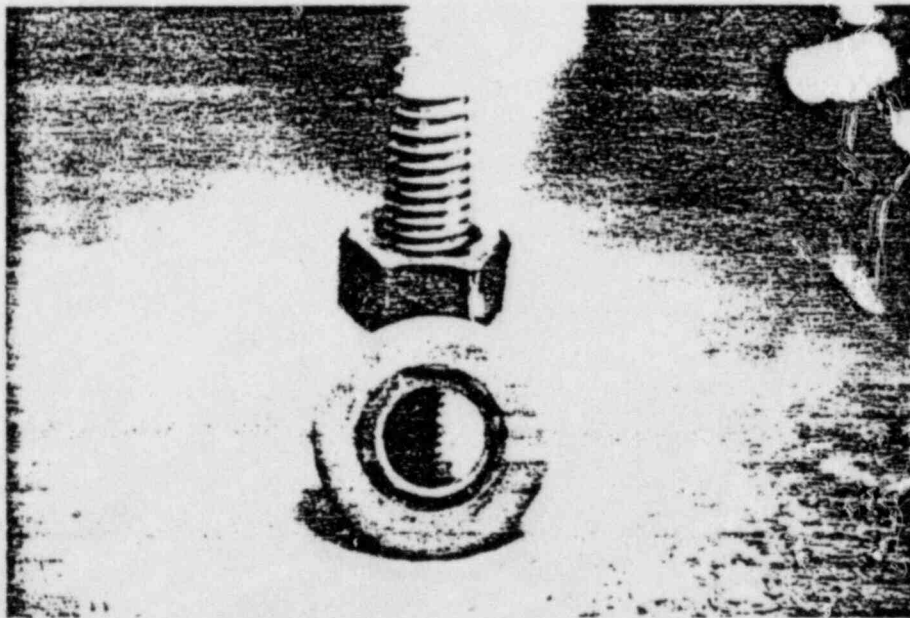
'Necking' of Threaded Section of U-Bolt
